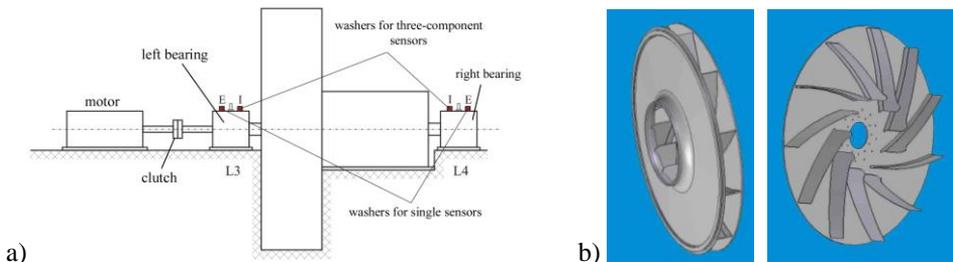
Radial ventilator a) whole view, b) rotor with details of blades.
